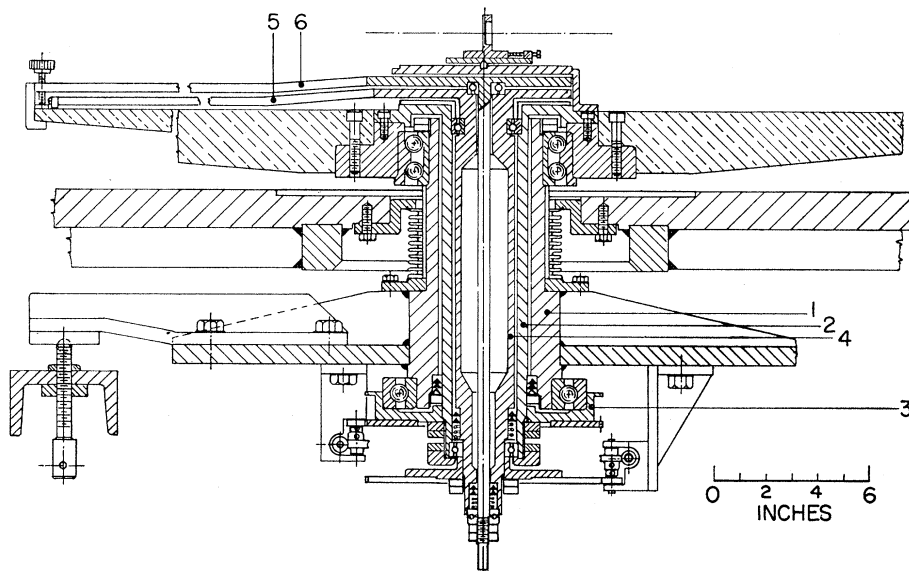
Table stem assembly. *B*, scattering table; 1, table support; 5 and 6, arms for support of detectors.
